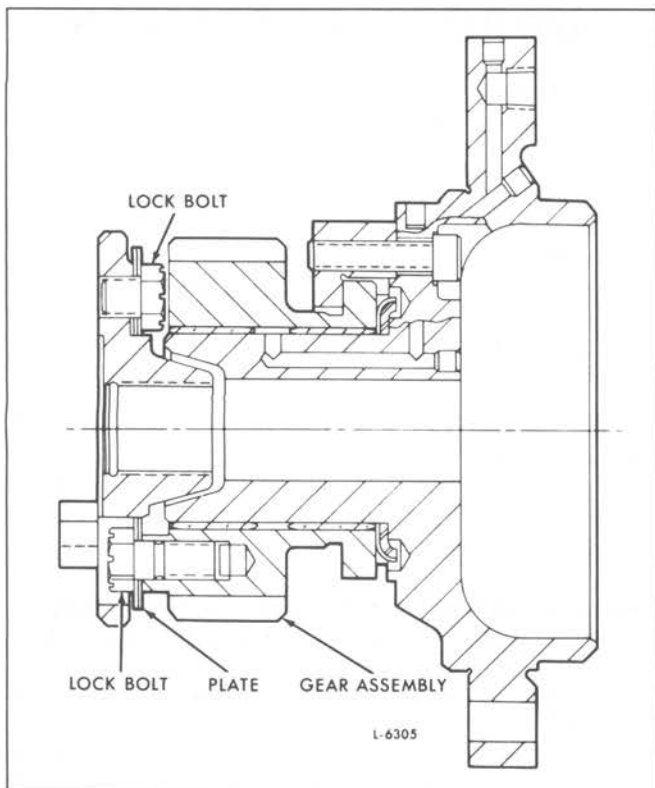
Rear Hub Assembly - Non-Turbocharged Engines
